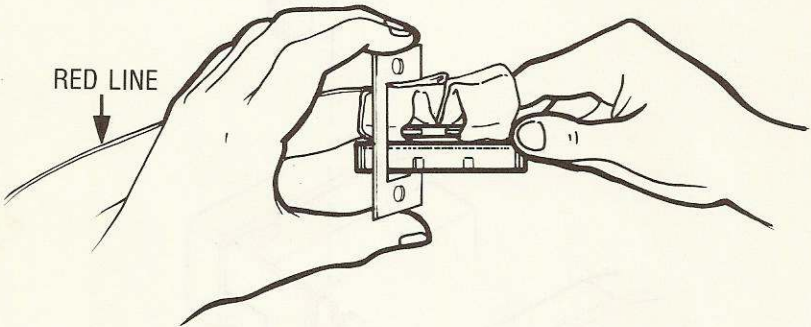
Fold connector and insert through backplate; attach backplate to cable clamp, but do not tighten screws
